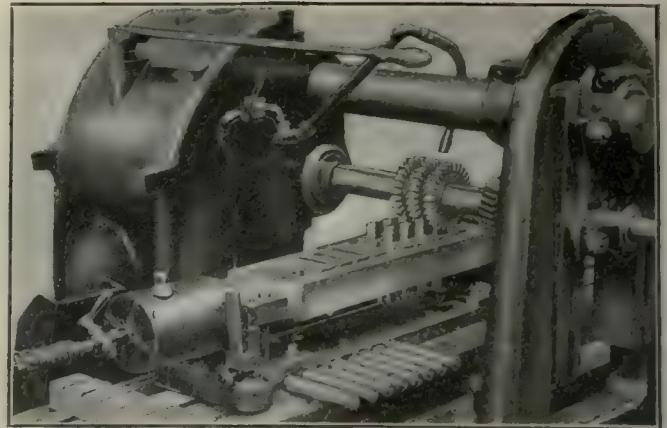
FIRST EIGHT PINS FINISHED AND REMOVED
